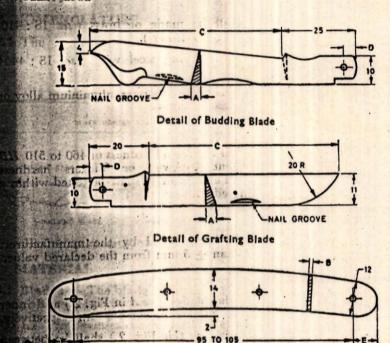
Dimensions of Blades and Handle Scale for Budding and Grafting Knife, Combined
